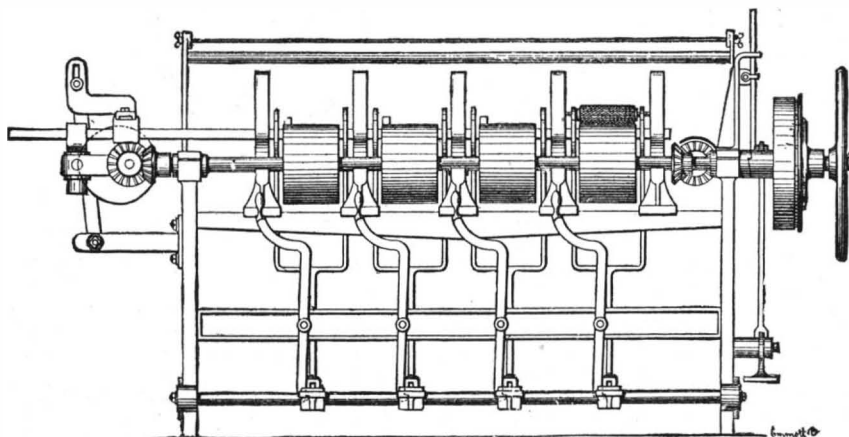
HALL'S WARPING MACHINE—FRONT VIEW.
